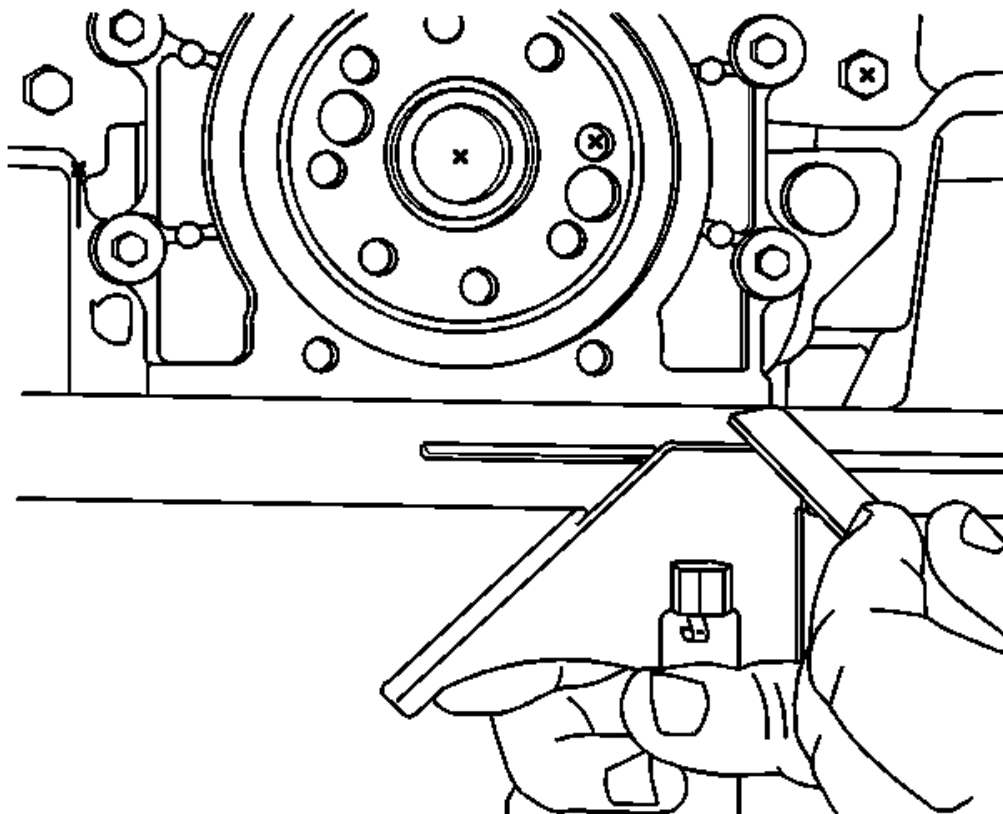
Measuring Cylinder Block Oil Pan Flange & Rear Oil Seal Housing Flange
